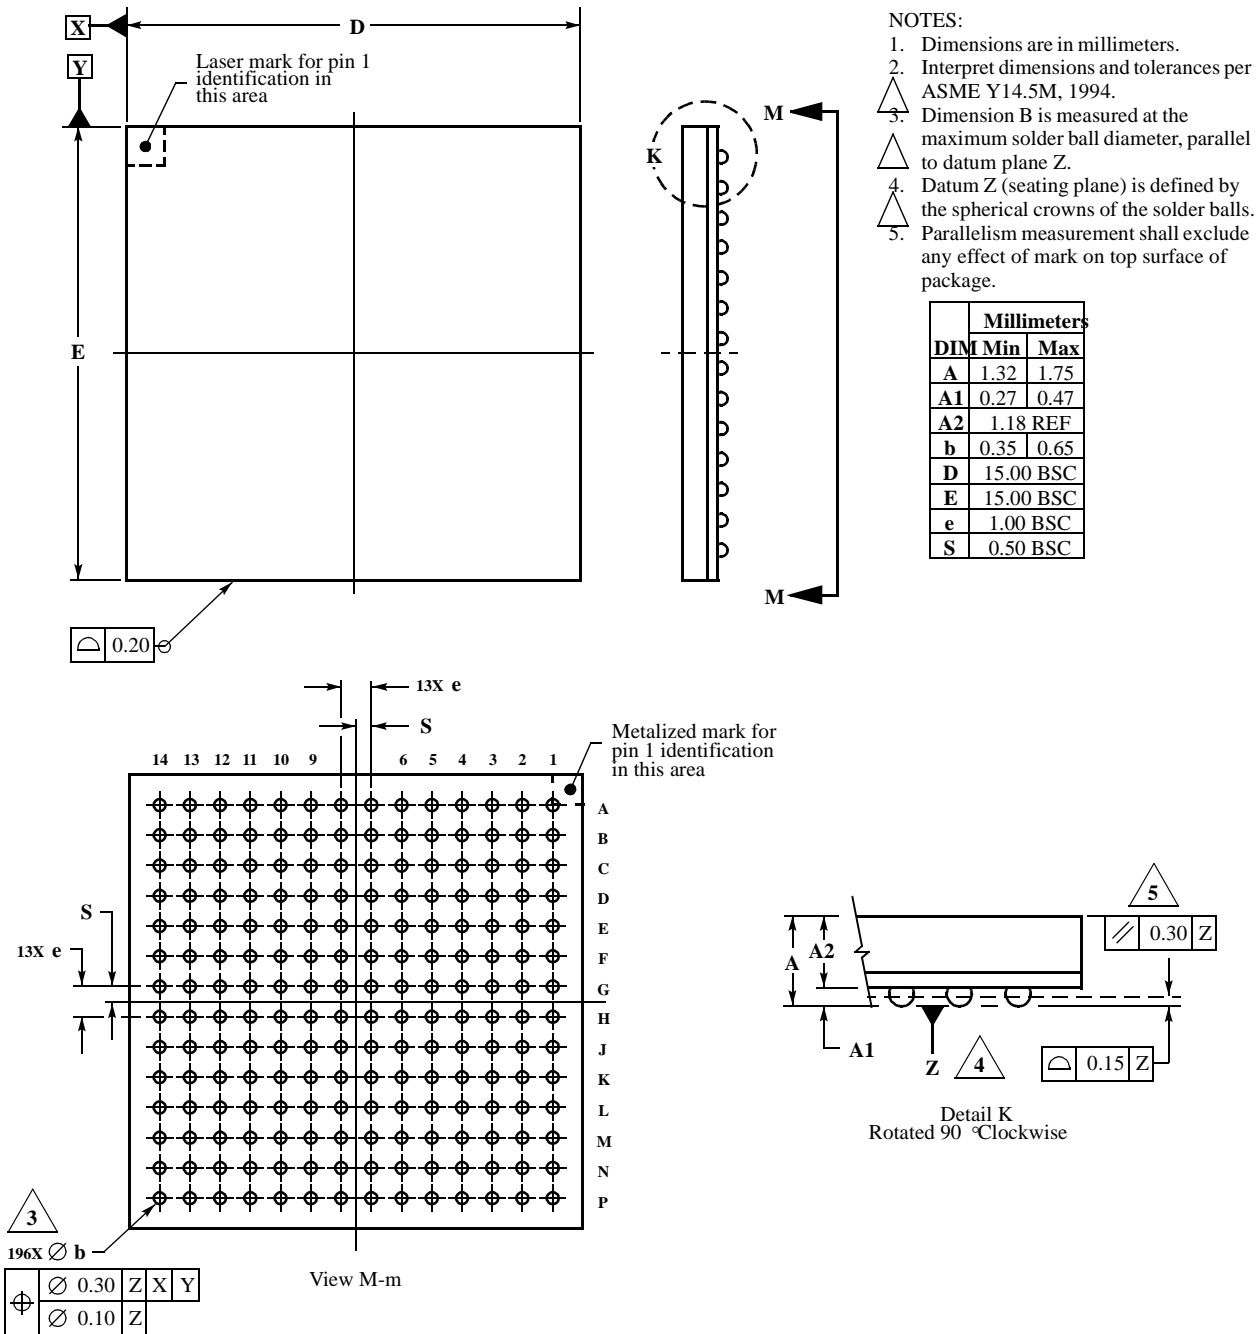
196 MAPBGA Package Dimensions (Case No. 1128A-01)
